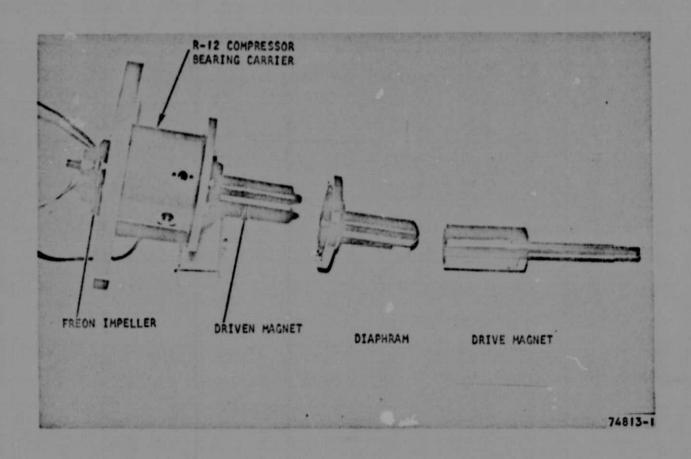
35.2-kw (10-Ton) Prototype Freon Compressor
